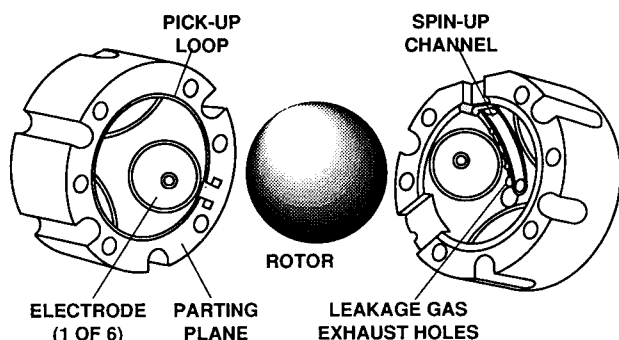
Exploded view of the GP-B quartz gyroscope assembly.
